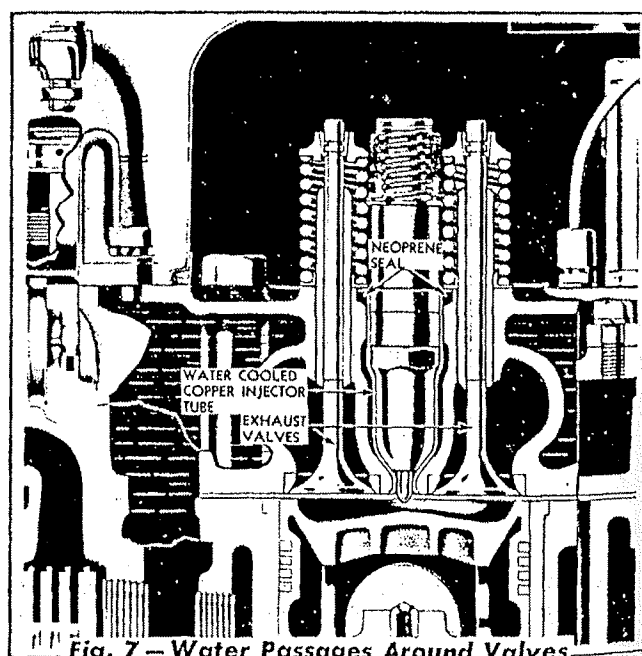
Water Passages Around Valves and Injector In Cylinder Head
